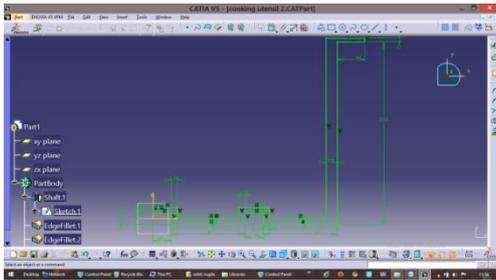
STANDARD COOKING UTENSIL DRAWING AND DIMENSION
